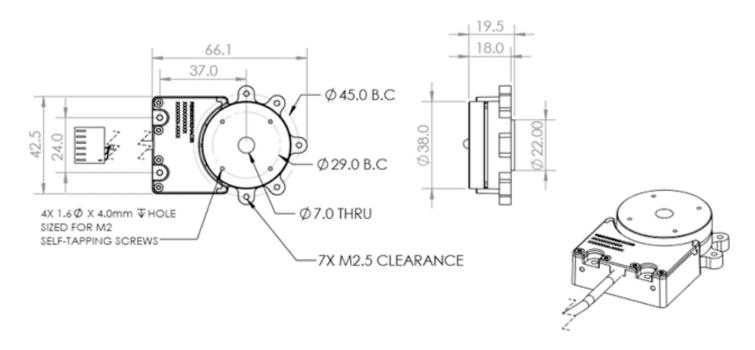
Mechanical drawing (mm) of RBS Hollow Shaft Rotary Motor without Encoder
